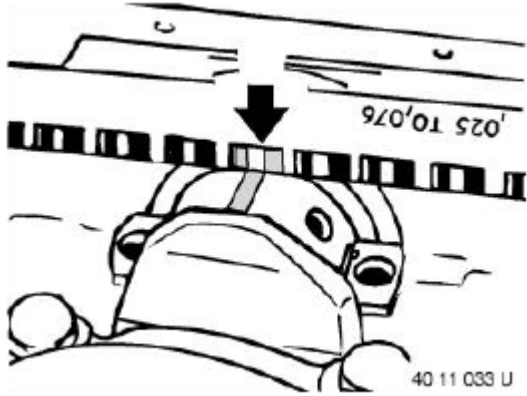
Reading Conrod Bearing Play At Width Of Flattened Plastic Thread On Measurement Scale
